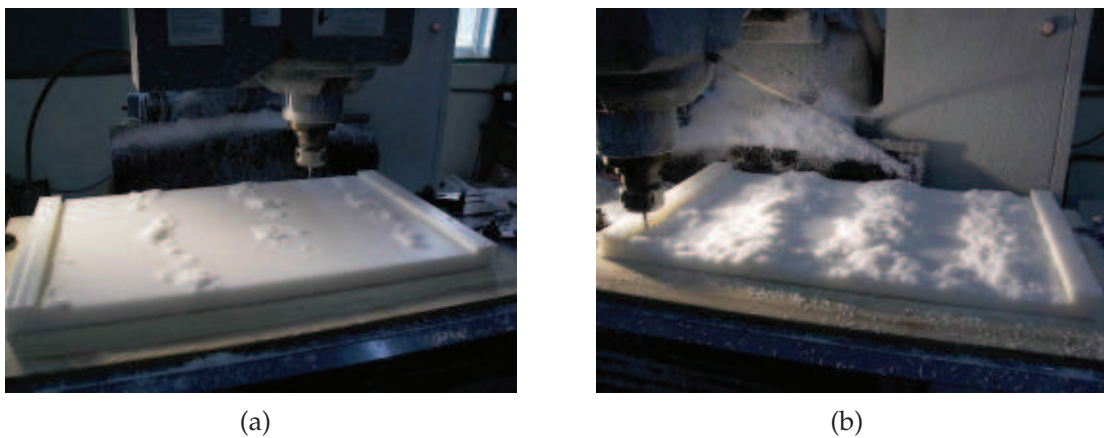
Coarse machining of (a) the first layer and (b) the second layer.
